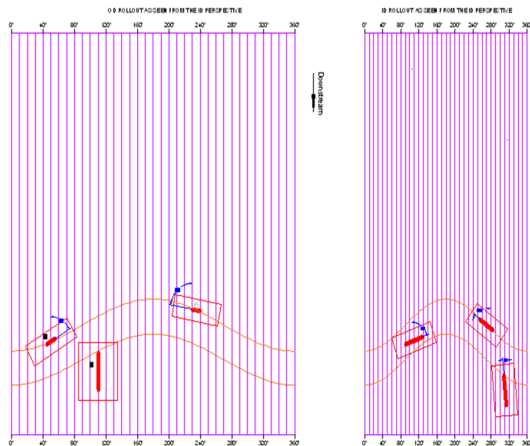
Open drawing of circumferential direction (Left: OD, Right: ID)
